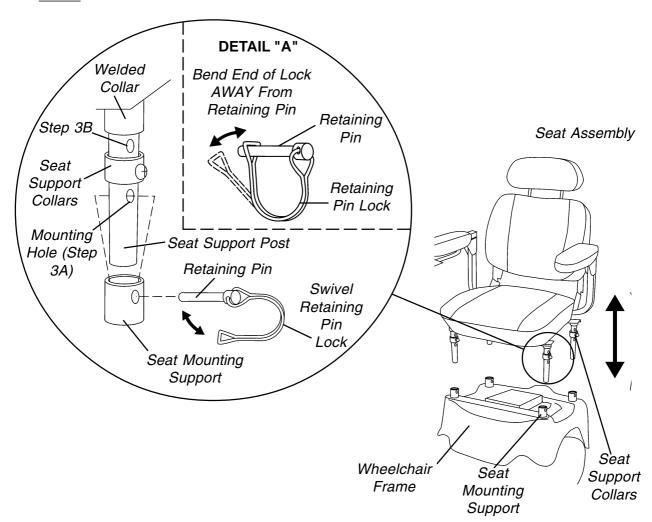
REMOVING/INSTALLING THE SEAT ASSEMBLY - SEAT ASSEMBLIES WITH SEAT SUPPORT COLLARS
